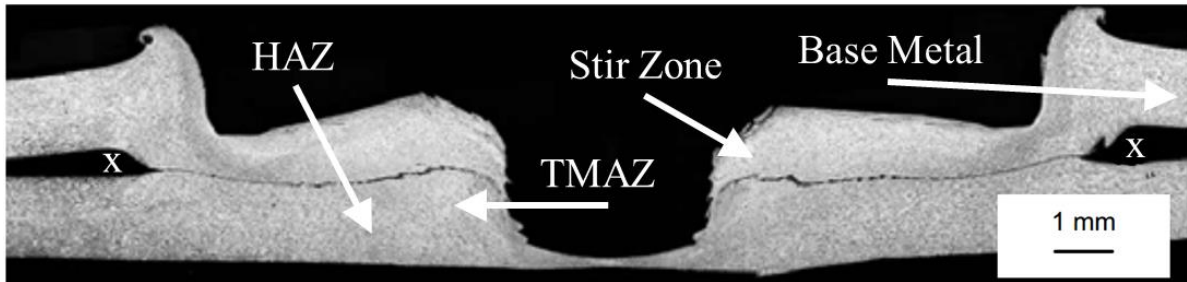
Cross-section view of an FSSW spot weld [Arul]
